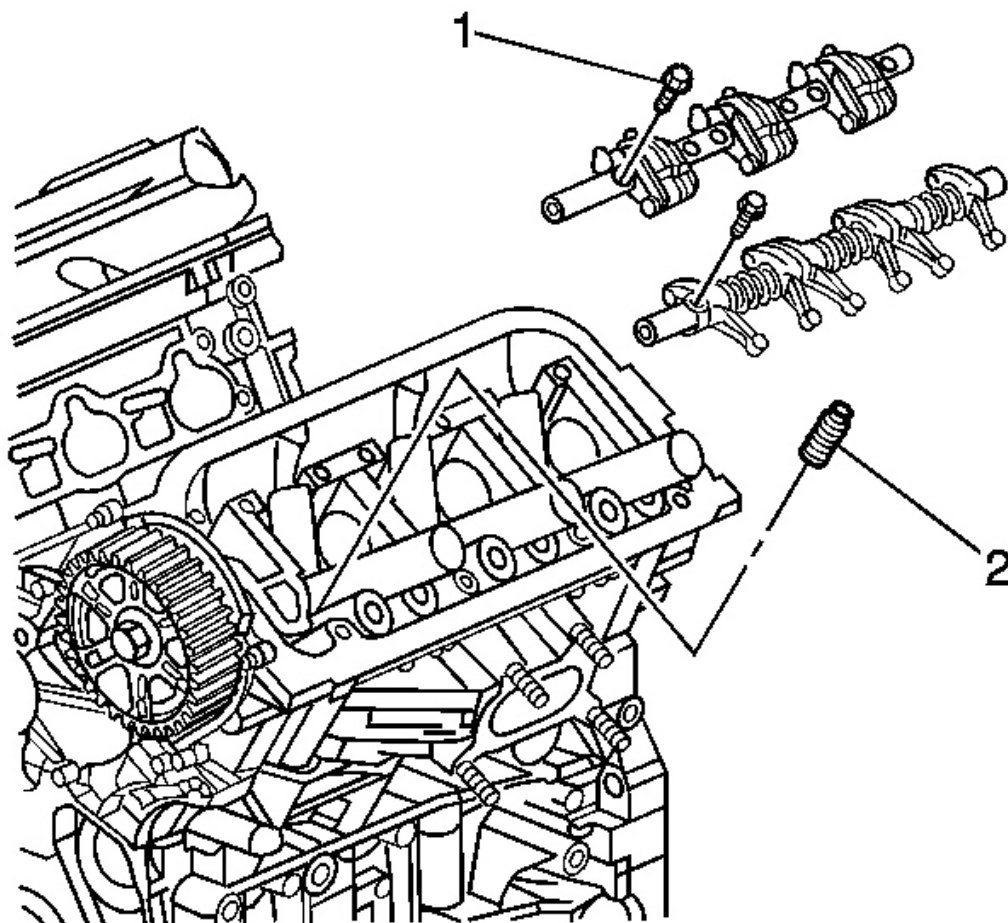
View Of Bolts, Valve Rocker Arm & Shaft Assemblies
